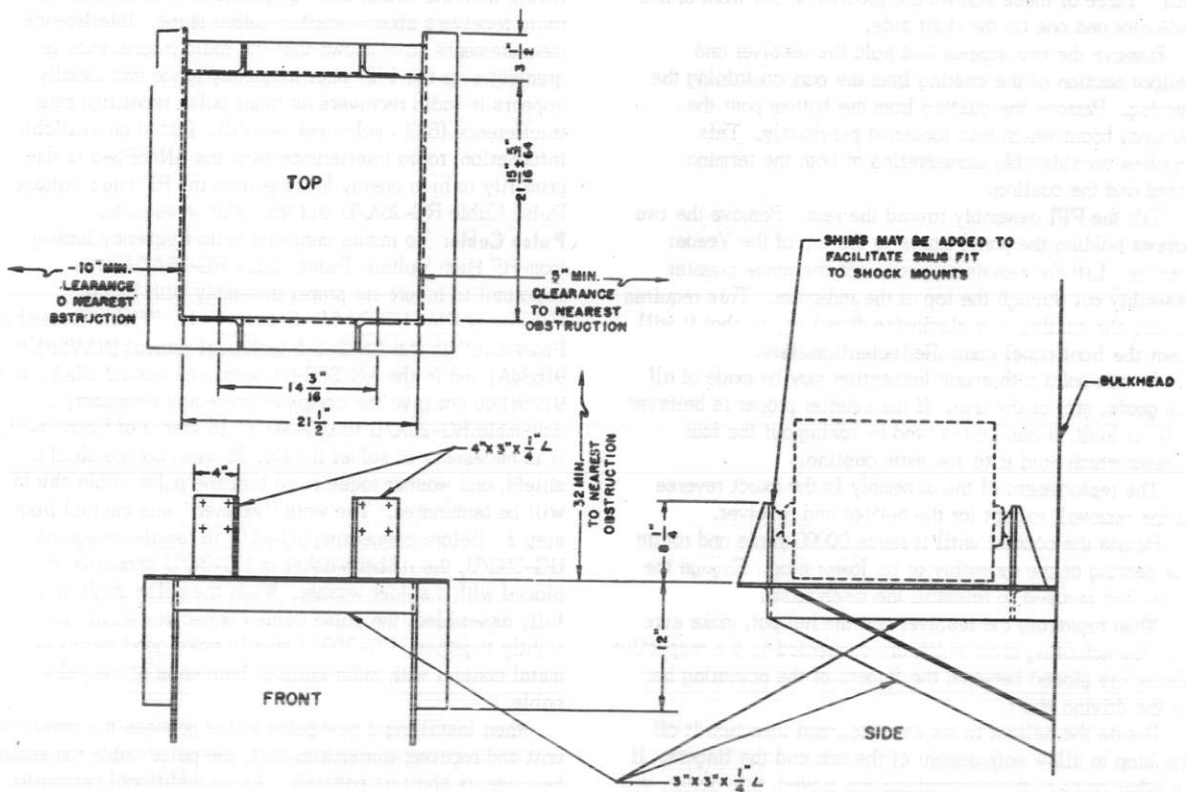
Rack Mounting and Clearance Requirements for Receiver-Transmitter Unit of Model AN/SPS-5.
